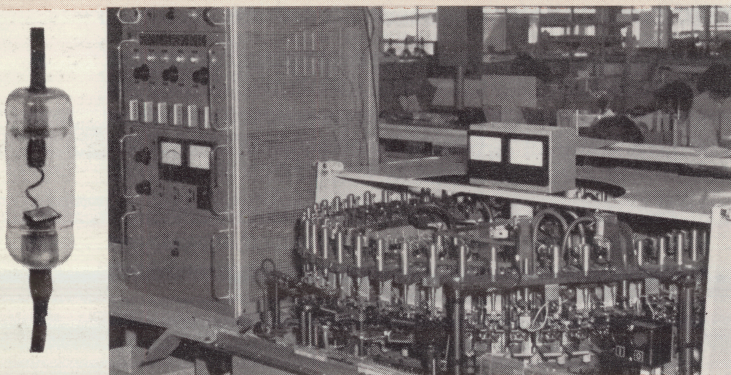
A 48-head testing and sealing machine which assembles the half-diode and anode assemblies. On left is a finally sealed diode.
